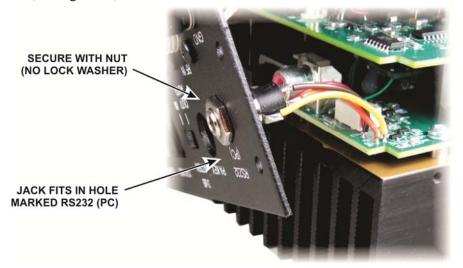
Mounting the RS232 Connector in the Rear Panel.
